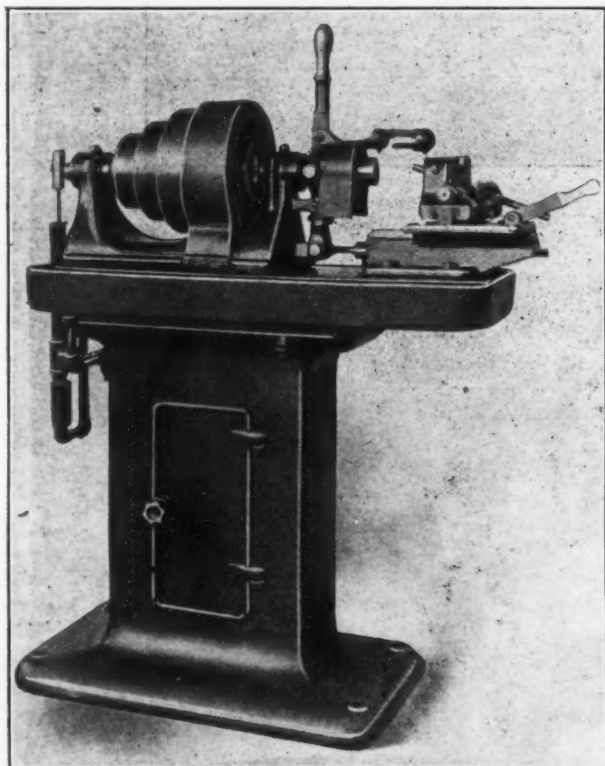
The New Tapping and Threading Machine Built by the F. E. Wells & Son Company, Greenfield, Mass.
